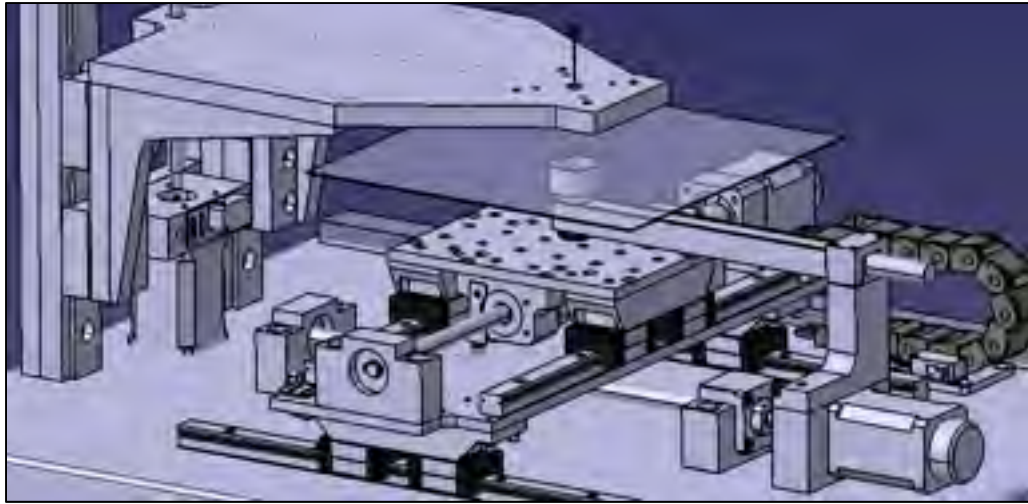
CAD model of final machine design (without collector plate mounts)
